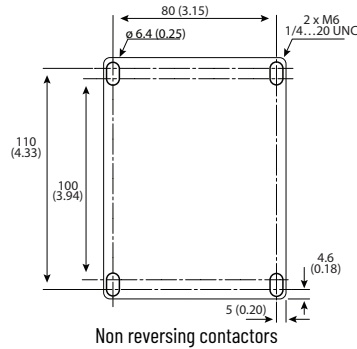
100-E80 4-Pole Contactors with Side-mounted Auxiliary ContactFigure 72 - Drilling Template for 80 A 4-Pole Contactors
